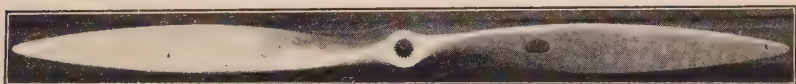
Forged type Curtiss-Reed metal propeller.
